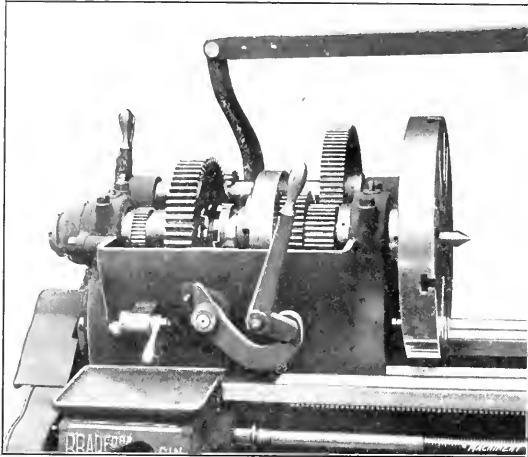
Head of Bradford Lathe with Cover removed to show Arrangement of Gears
